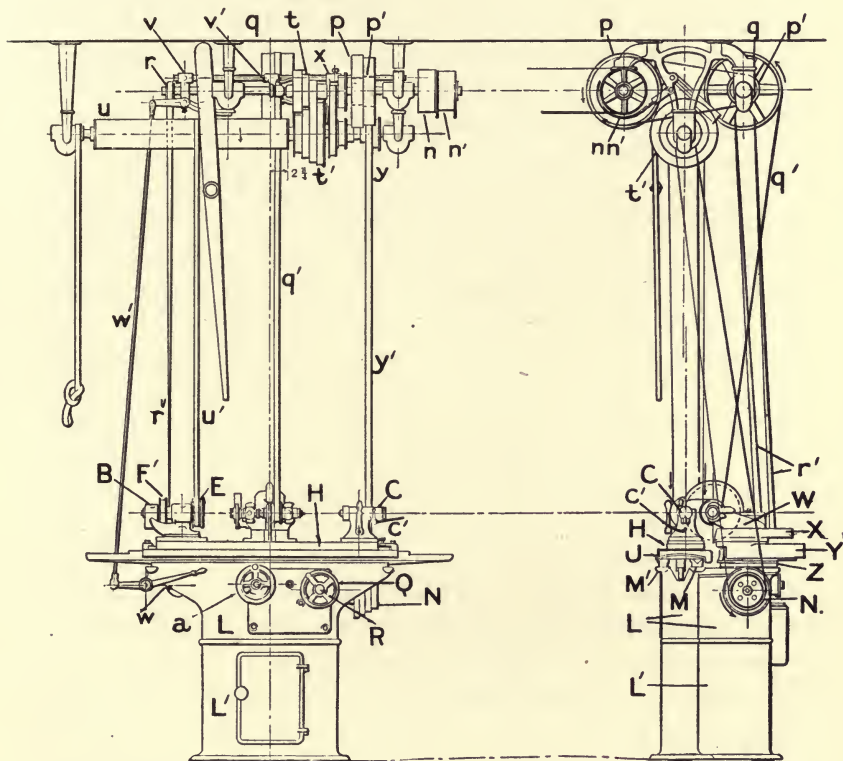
BROWN & SHARPE No. 1 UNIVERSAL GRINDER. ARRANGEMENT OF THE DRIVE
